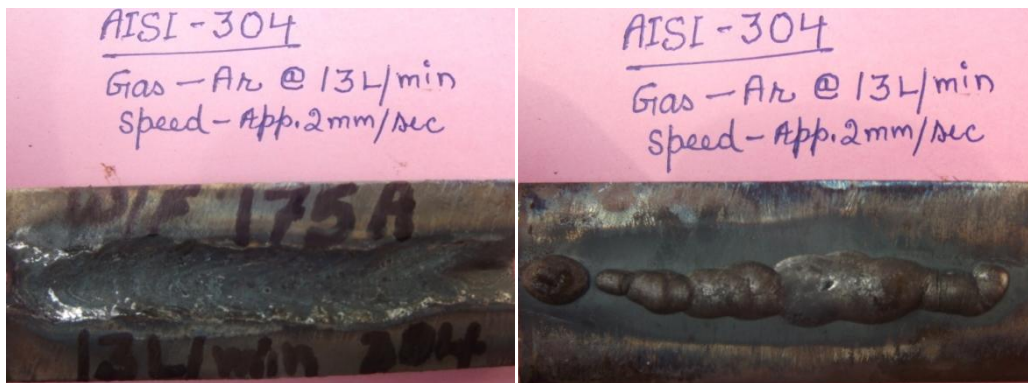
Macrograph showing weld bead appearance of A-TIG welding on AISI 304 at 175 A, with Ar as shielding at a flow rate of 13 L/min at welding speed of 2 mm/sec.
